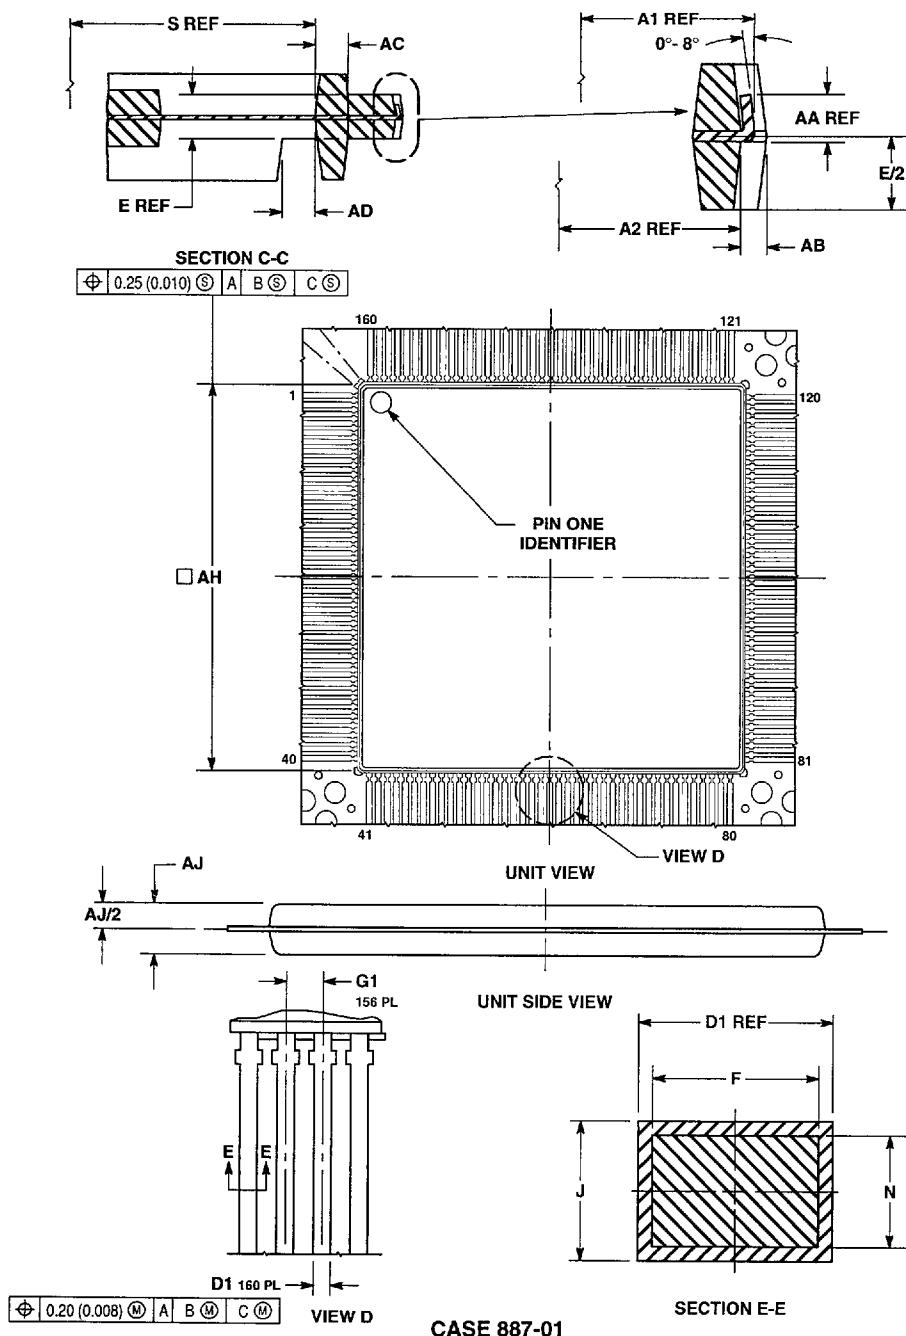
160-Pin Molded Carrier Ring Assembly (Part 2)
